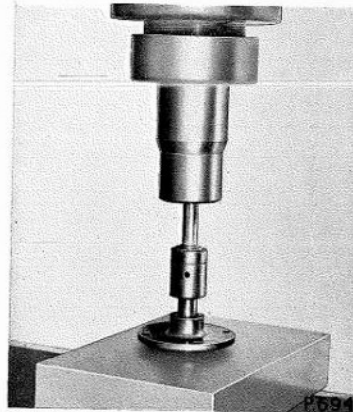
Pressing the bearing shaft into the fan mounting flange (Pump body omitted for clarity)
